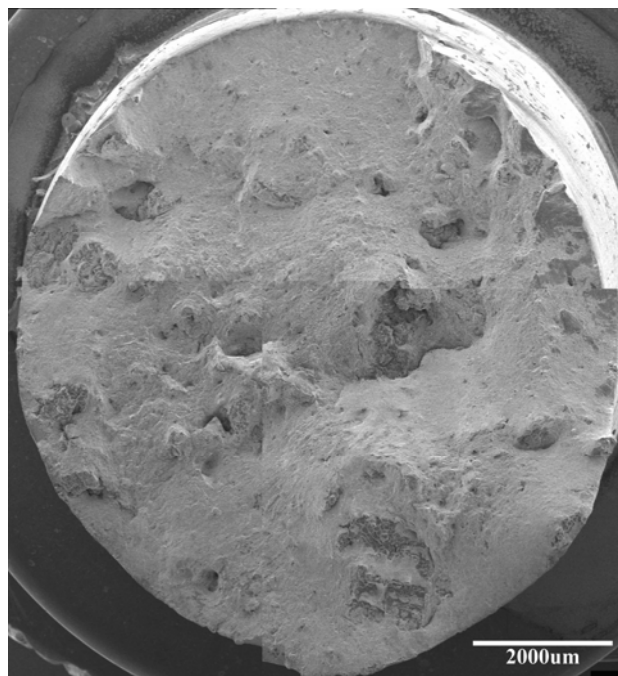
Macroscopic View of a Sound Monotonic Test Specimen Fracture Surface (Specimen A3)
